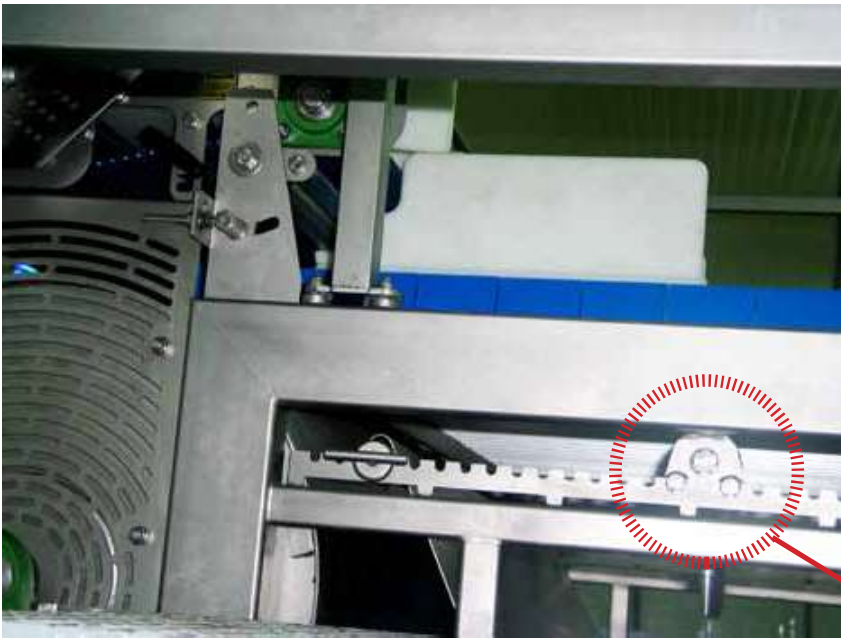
c. Side-view of Style grading machine showing how the first adjusting bar is installed in the grading machine. A small plate is fastened to the ends of the bars that is then installed on top of the slotted flat bar and bolted in.
